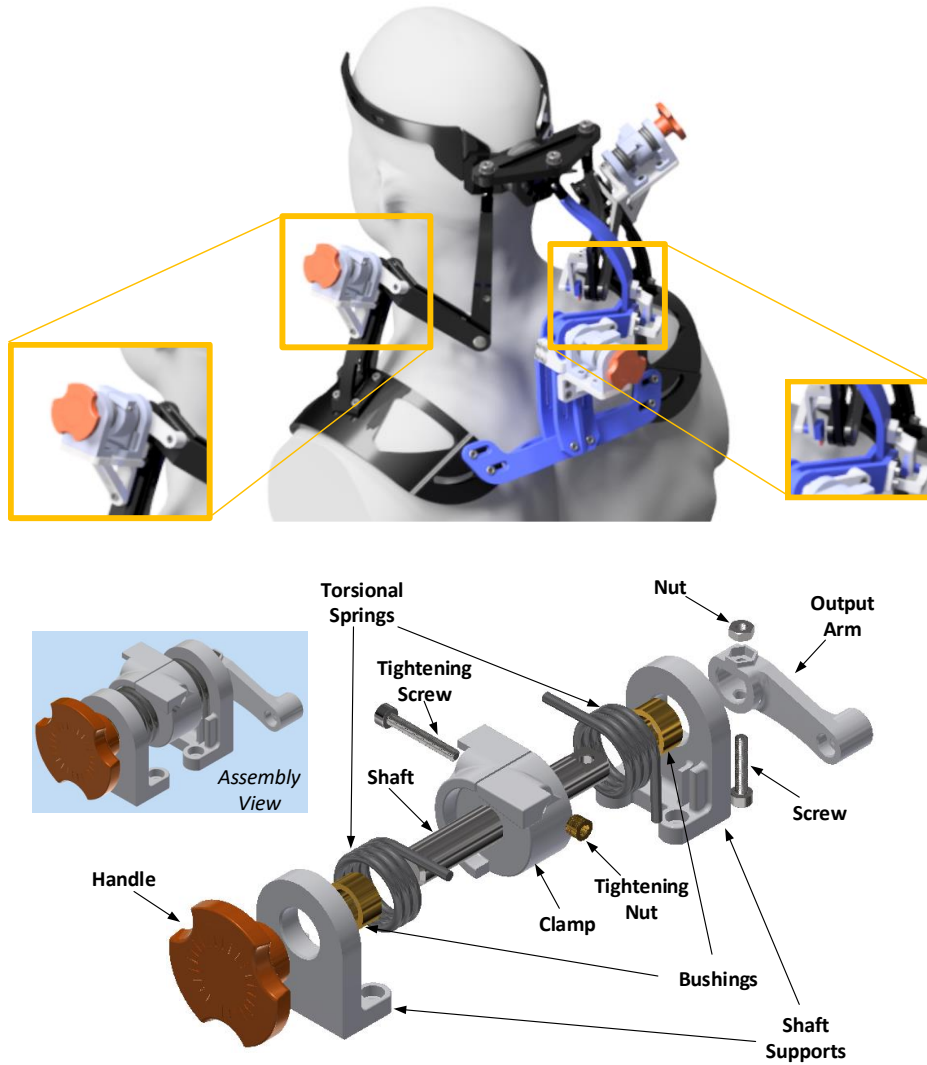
The model of the spring-loaded neck brace: (top) CAD assembly and (bottom) exploded-view of the spring actuator.
